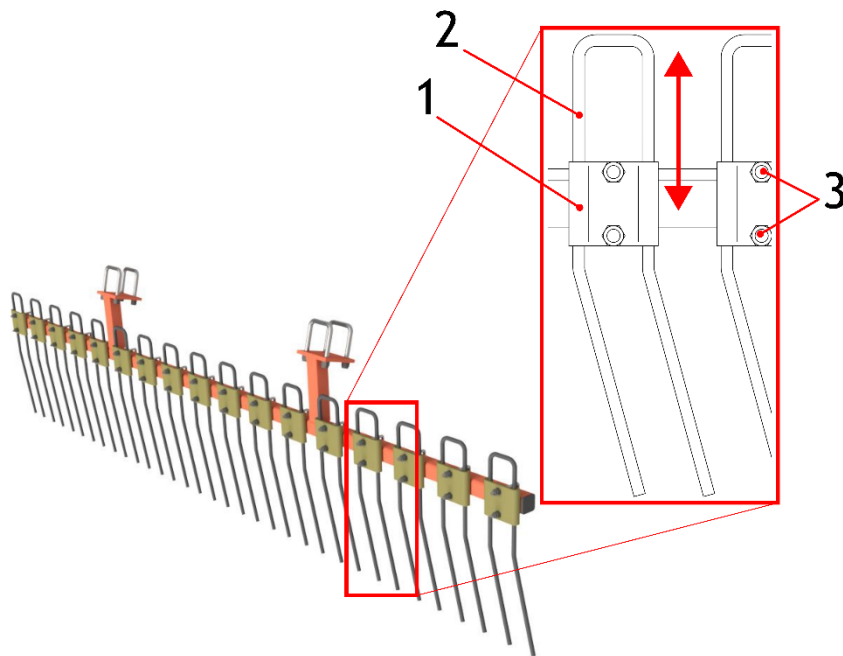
Adjustment of the position of the spring screen claws (1 – mounting plate, 2 – spring claw, 3 – fastening nuts)
